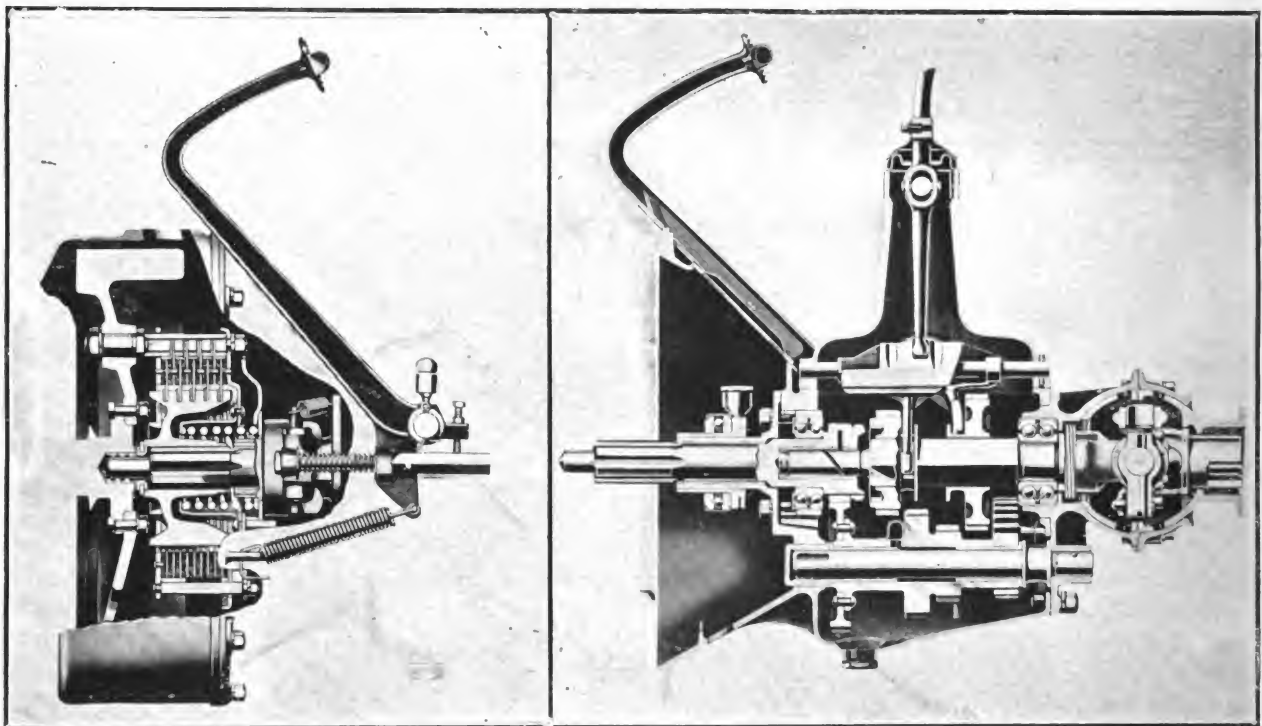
Clutch (at left) showing fabric faced discs and enclosed spring. sturdy shafts. At right, transmission showing wide-faced gears and
